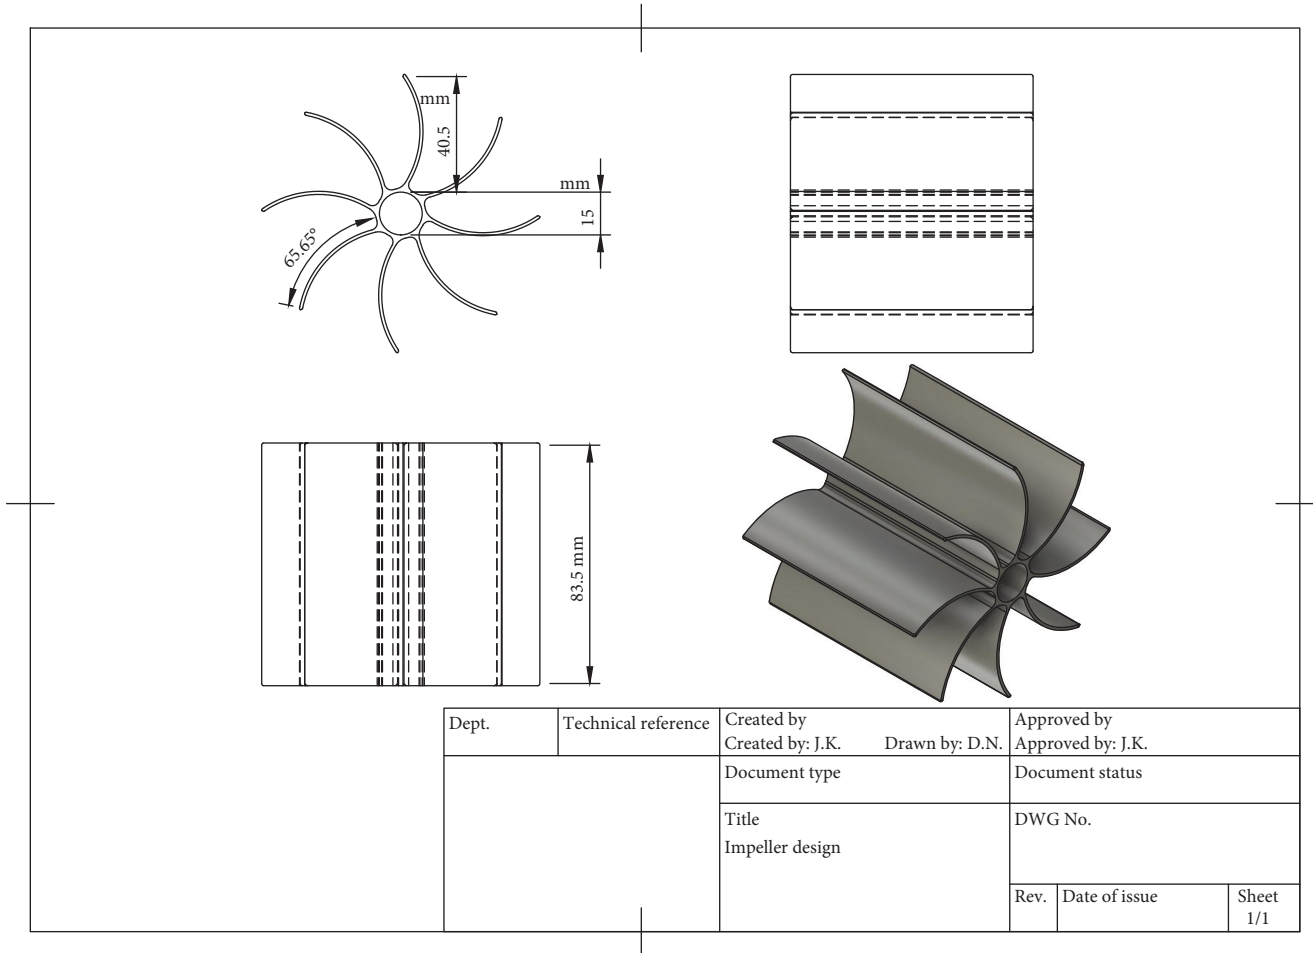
Impeller drawing for a designed 15 mm diameter runner.
